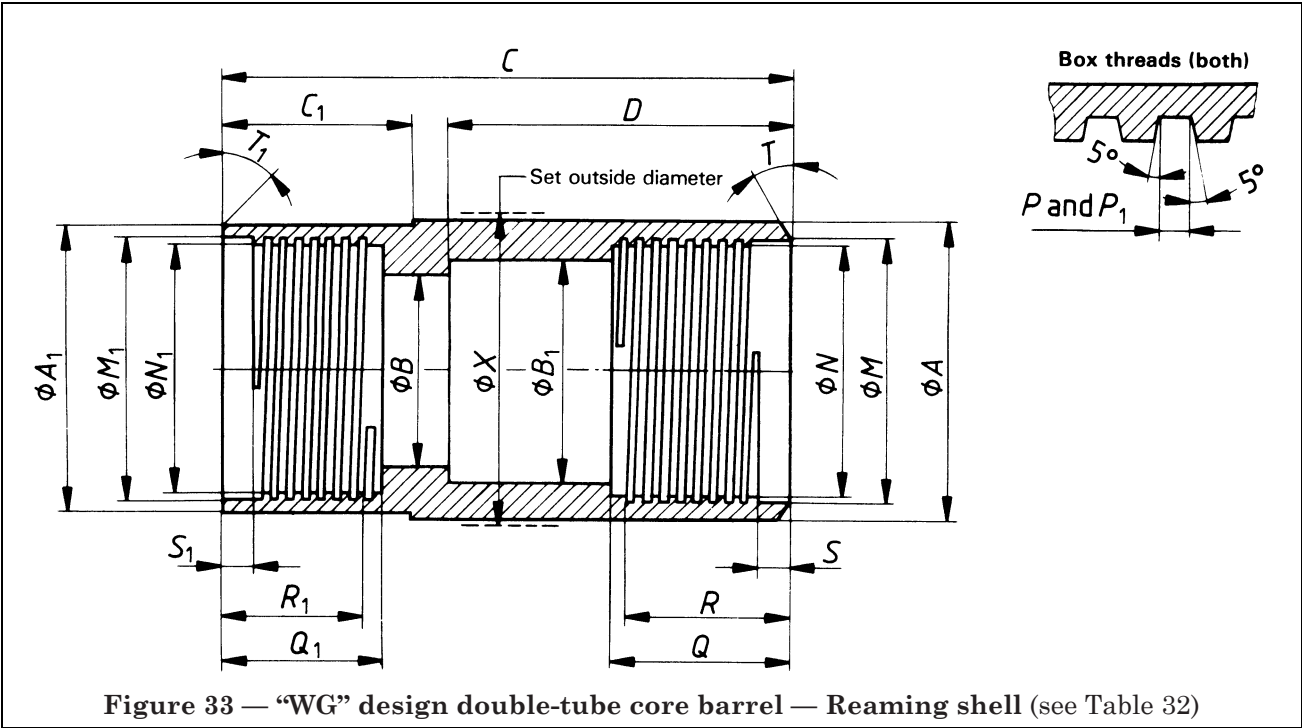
“WG” design double-tube core barrel — Reaming shell (see Table 32)
